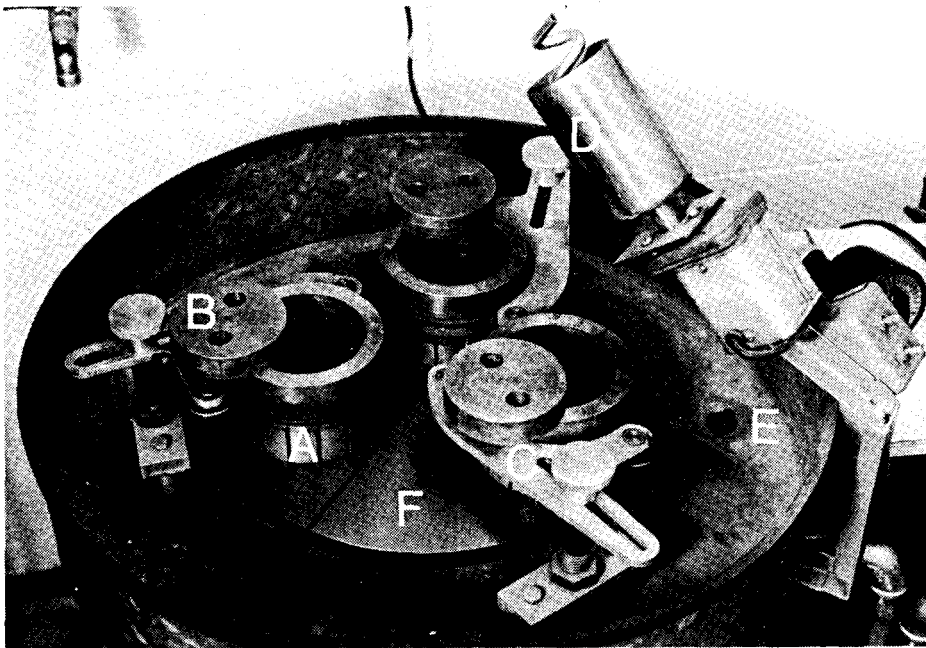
LAP. Diameter of 16 in. A = rotating slotted specimen holder; B = cover plate to set on top of specimen; C = guide yoke that retains specimen holder; D = grit-slurry cup mounted on its motor and containing spiral agitator-pump; E = drain; F = grooved lap.
